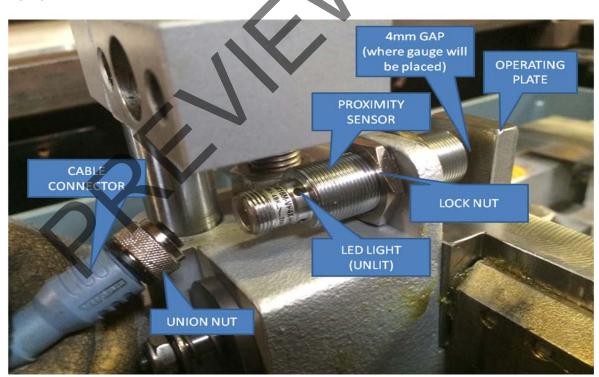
Lock Guide Raised and Folded Back, Making Proximity Sensor Accessible (Step 6)
